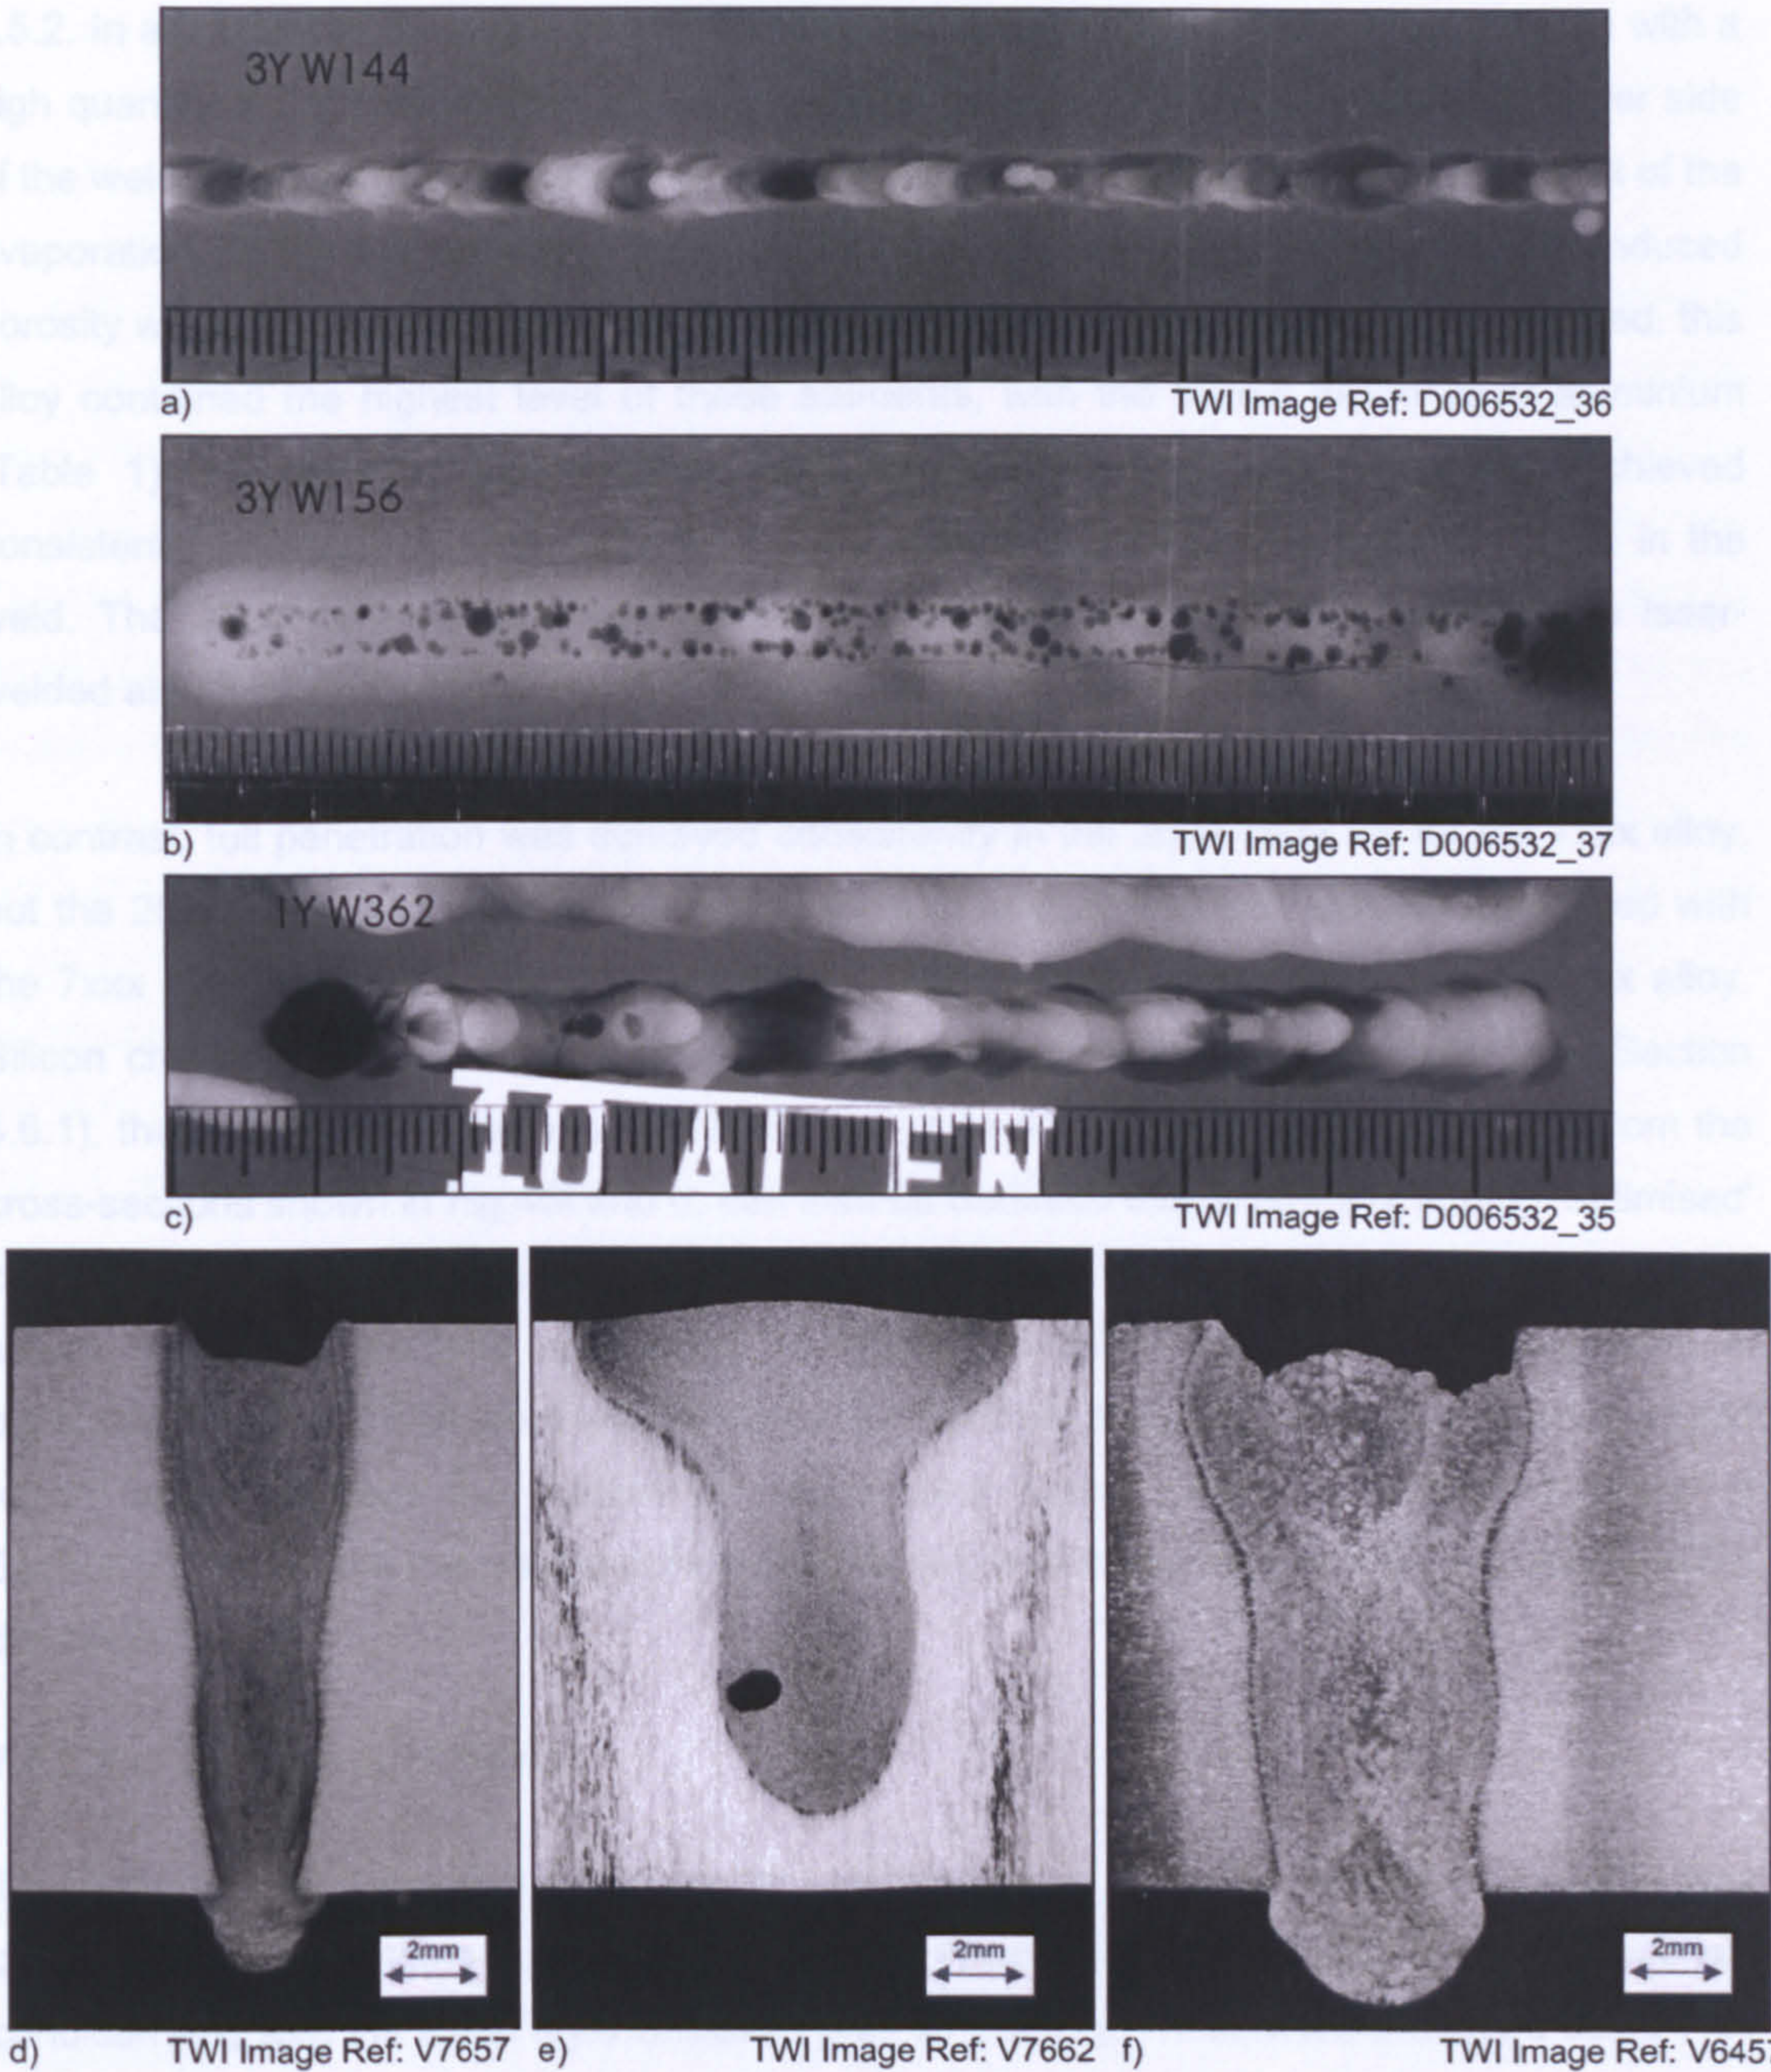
Fully penetrating melt runs produced in the PF welding position using 7kW of Yb-fibre laser power focused in a 0.6mm spot size at a welding speed of 0.65m/min, in 12.7mm thickness:
